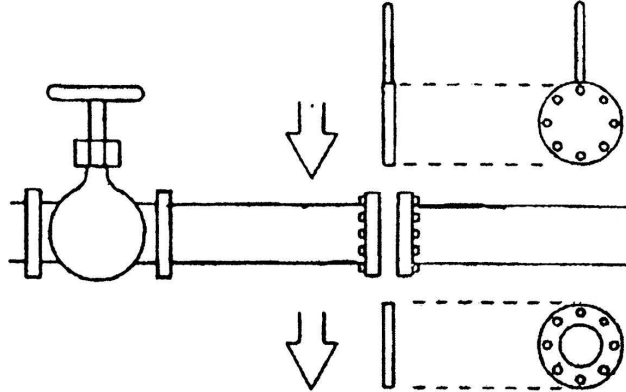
Method of Blanking Hydraulic/Pneumatic Lines
